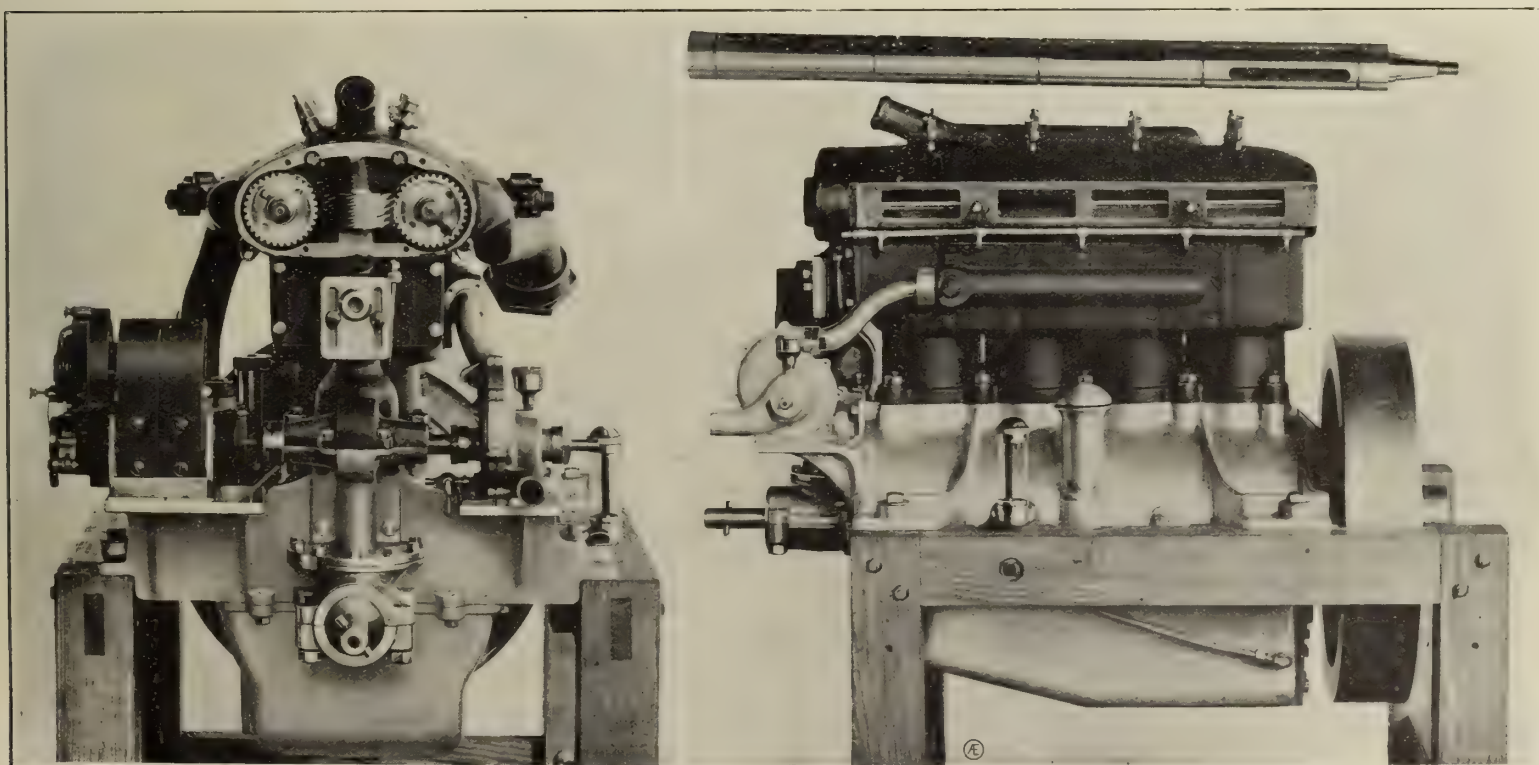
The Mead Engine, showing the method of driving the valves; a view of one of the latter is inset.
